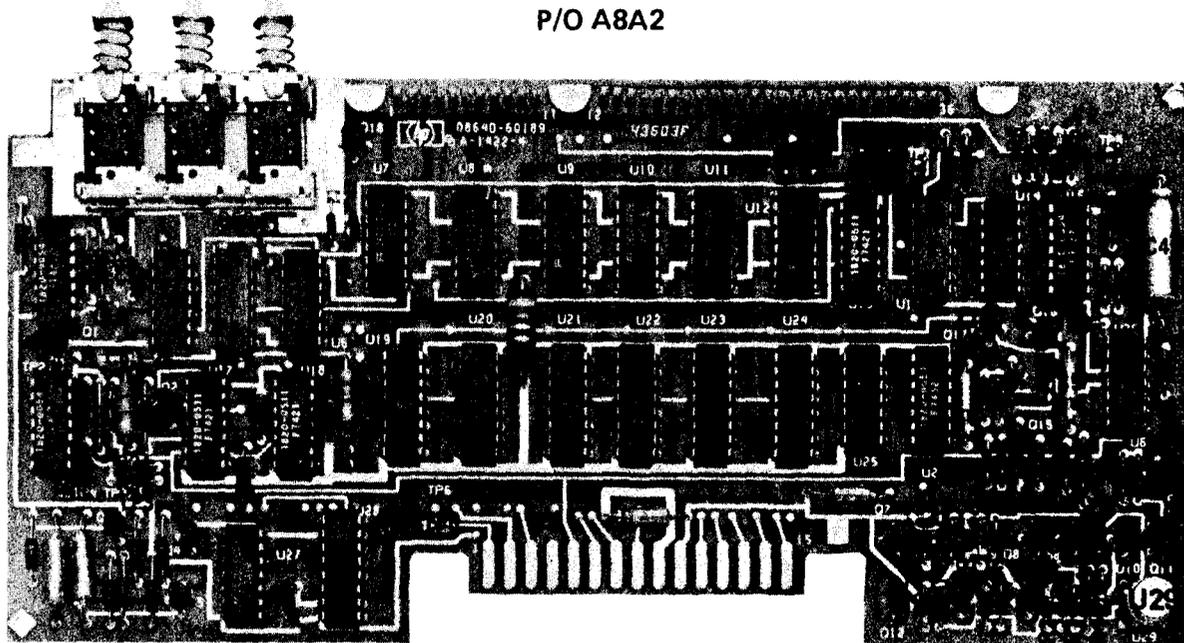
P/O A8A2 Counter/Lock Board Assembly Component Locations (P/O Change 1)
